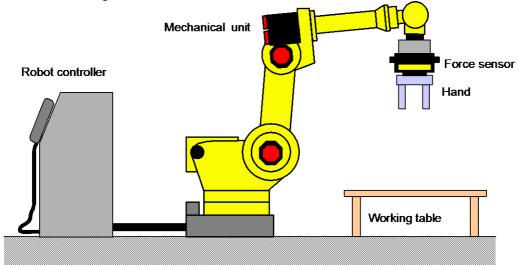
(a) Standard configuration (hand mount sensor)
